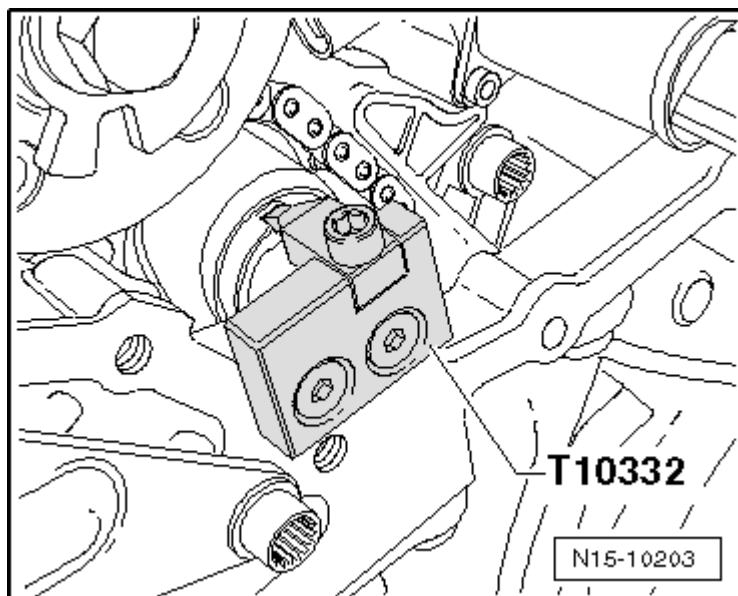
Securing Position Of Drive Pinion For High Pressure Pump Using Adjustment Tool T10332
